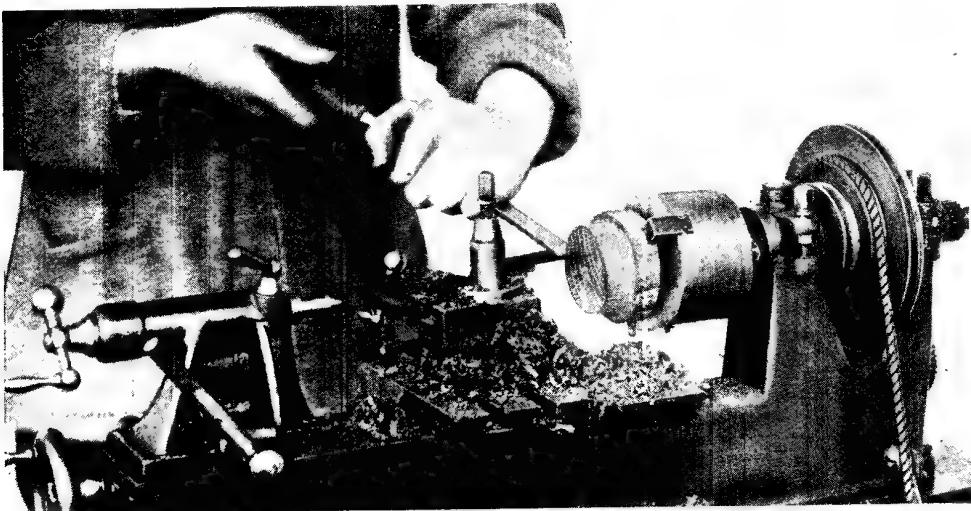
In this photograph a parting tool is being used to cut out a centre part of the ebonite earpiece block, which is subsequently turned up true on a screwed mandrel, as shown in Figs. 29 to 31.
